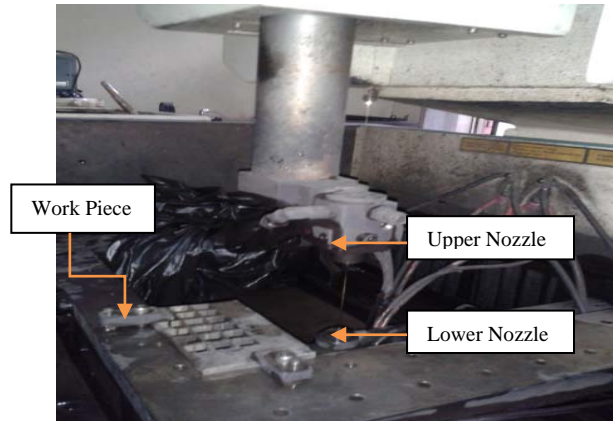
Elektra sprintcut 734 wire-cut EDM
